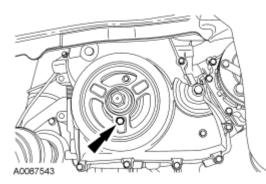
Aligning Crankshaft Pulley Bolt Holes Courtesy of FORD MOTOR CO.
